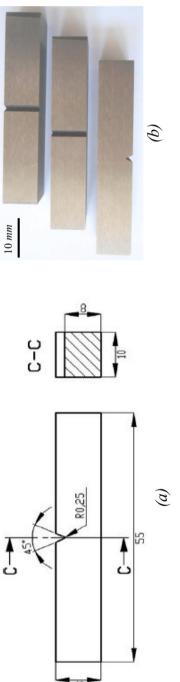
Charpy V-notch specimens: (a) Geometry and dimensions (in mm), (b) machined Charpy V-notch specimens.
